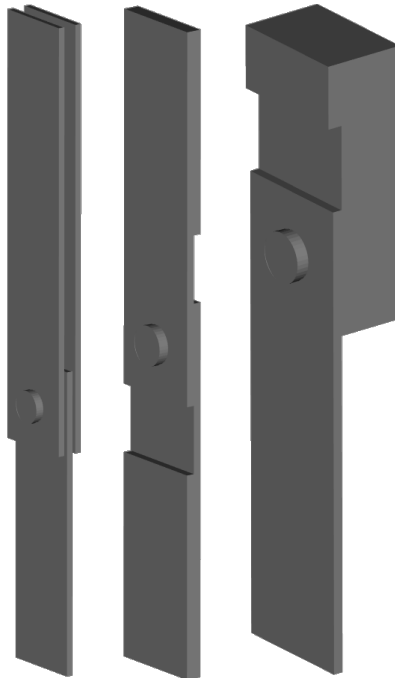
Bearing tests – double shear on the left, single shear 2-piece on the middle or single shear 1-piece on the right – characterize the first failure mode of mechanically fastened joints.
